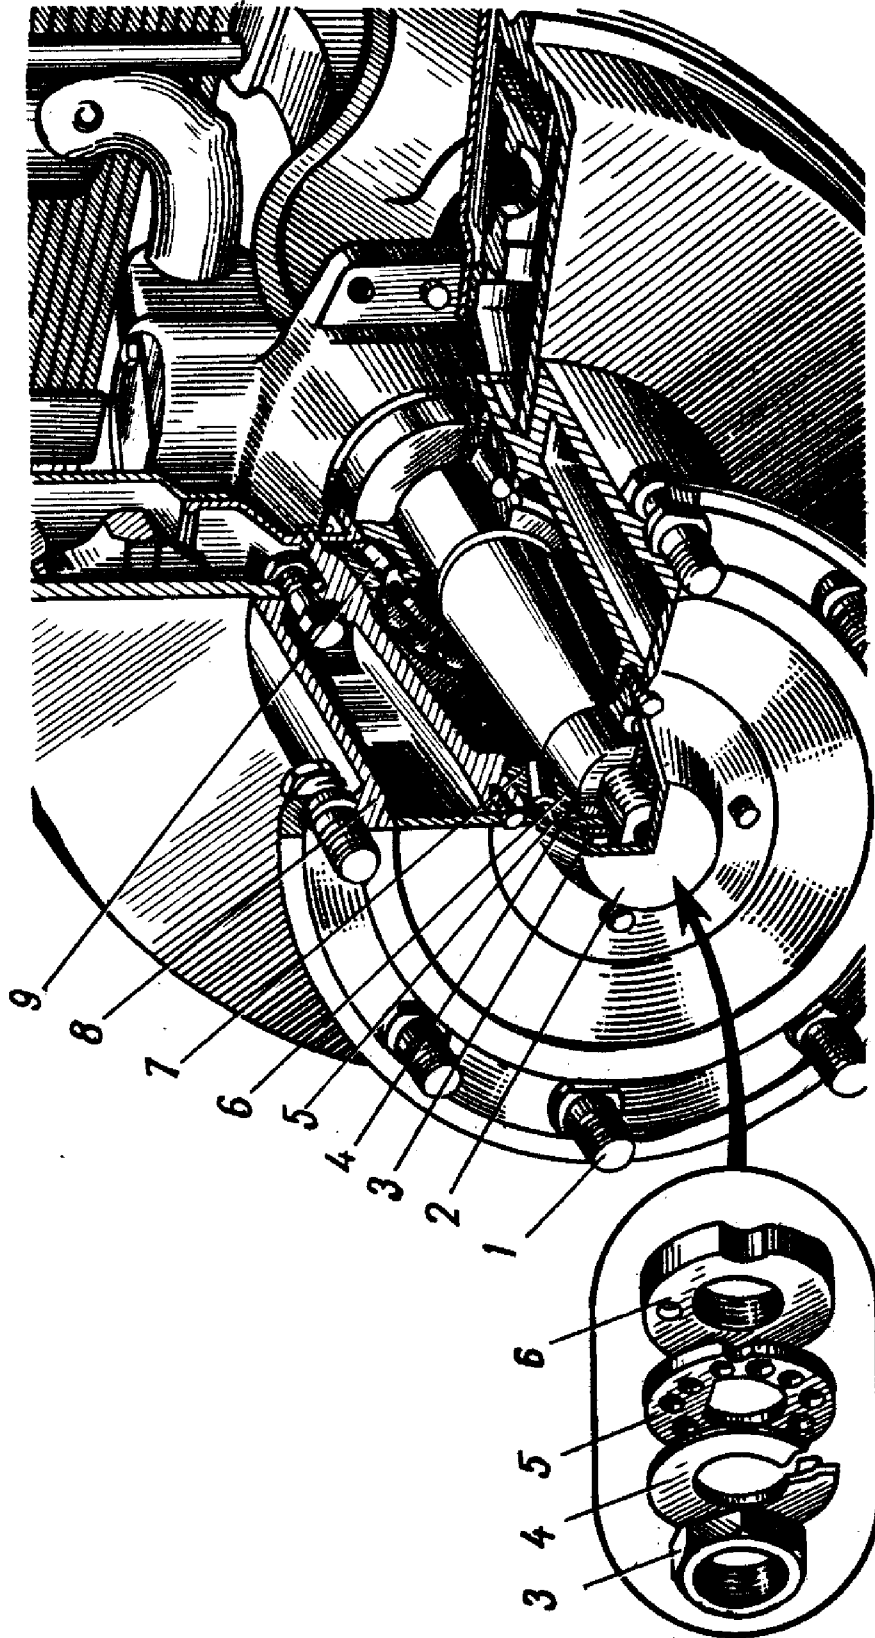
FRONT WHEEL HUB OF 3MJ-130 TRUCK
